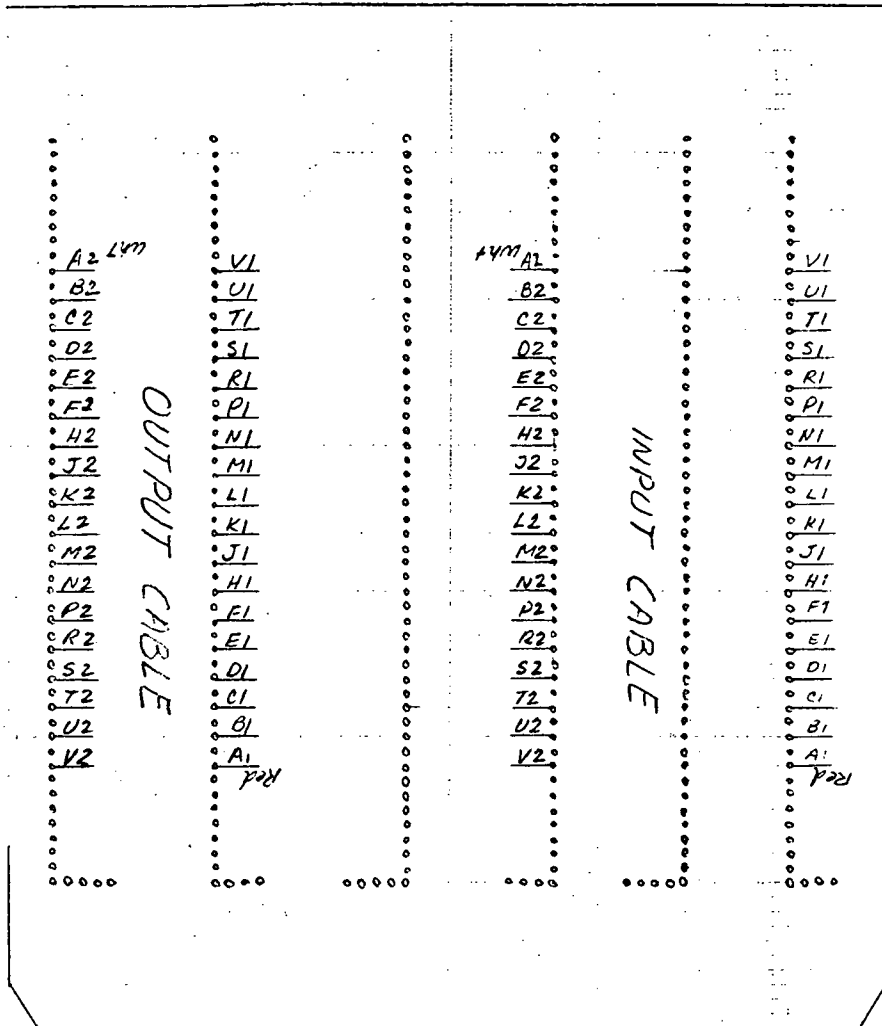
PHYSICAL LAYOUT OF PLUG CARD 1-H
